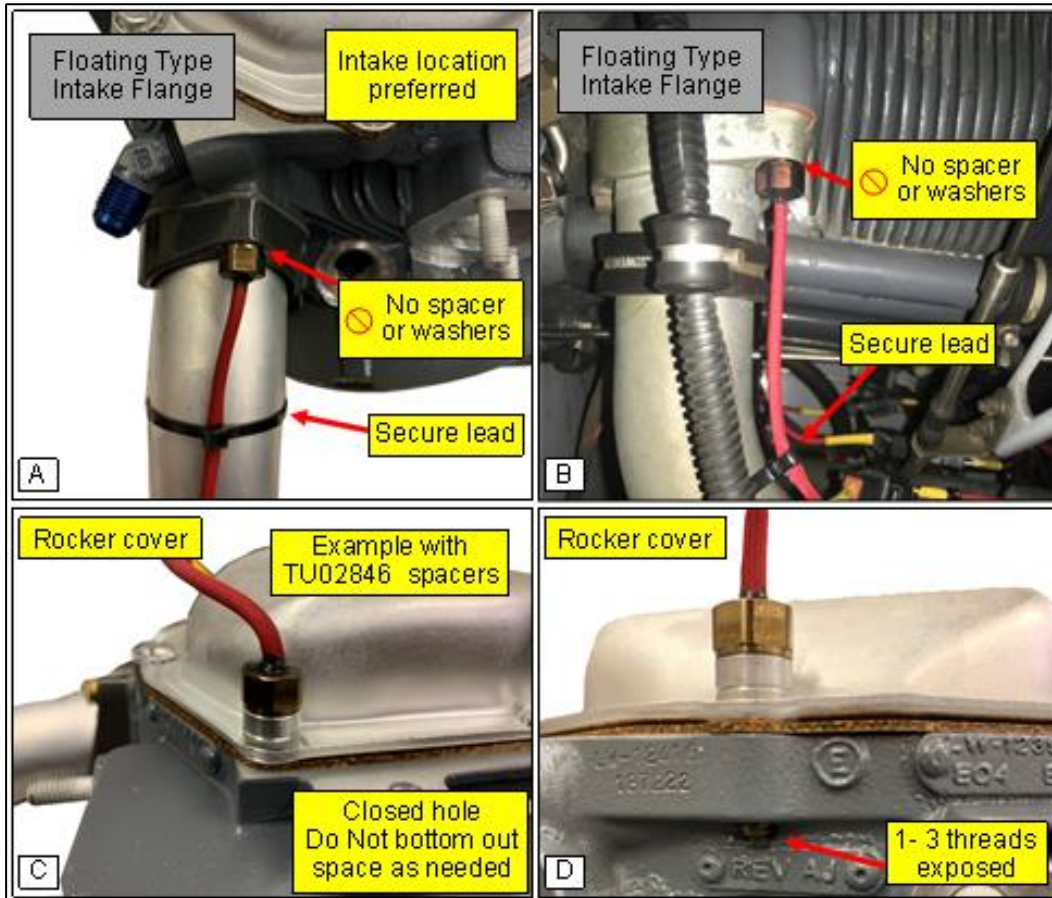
Lycoming cylinder head w/ floating type intake flange: 145 through 780. Note: For fixed type flange refer to Figure 7.8.
